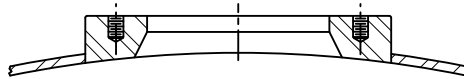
Agitator Mounting Flanges
